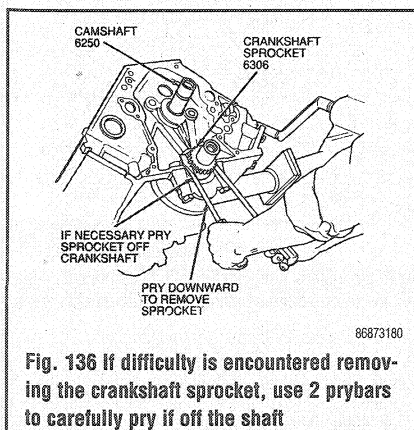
If difficulty is encountered removing the crankshaft sprocket, use 2 prybars to carefully pry it off the shaft
